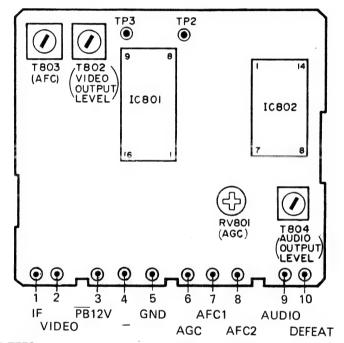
Tuner/IF P.C. Board (Parts Side)
